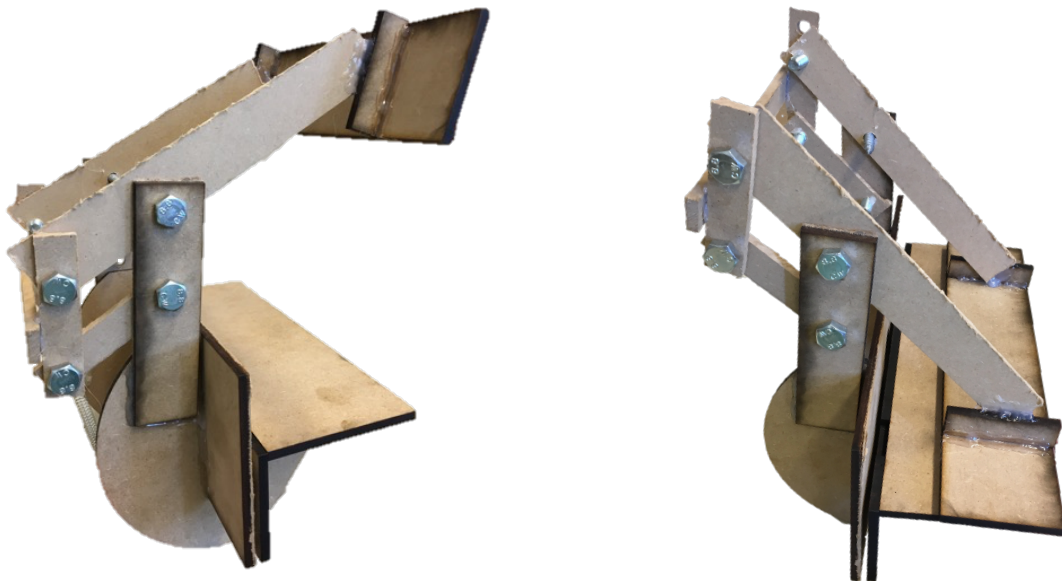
The combined product of the third iteration gripper prototype and a self-sustaining clamping mechanism prototype.
